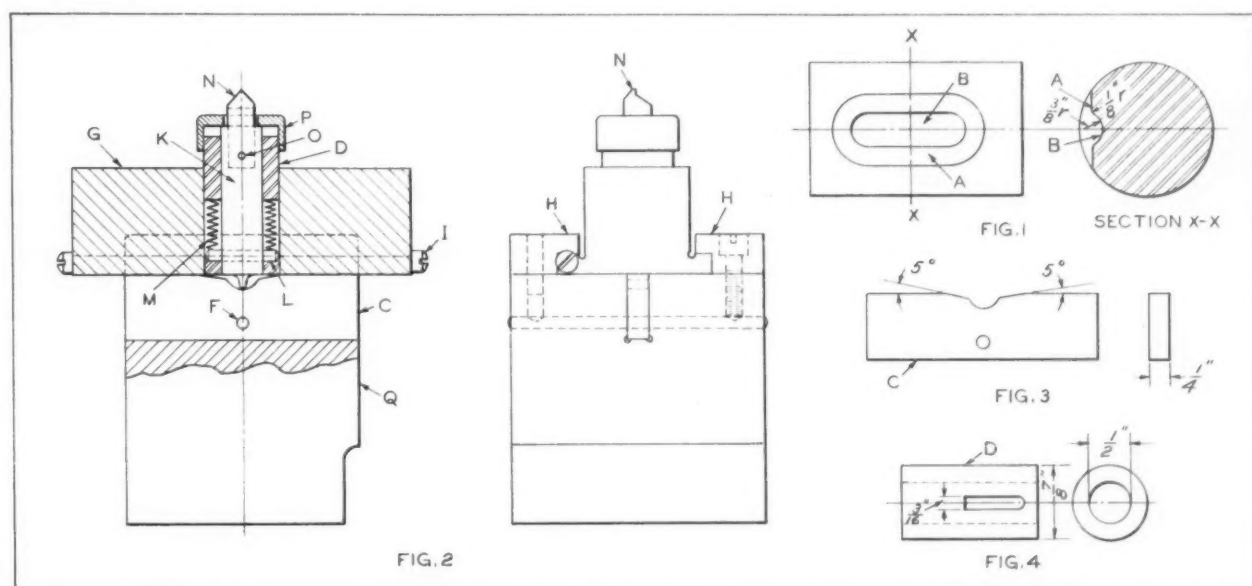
Steel Pin with Flat Spot *A* and Groove *B* Ground after Hardening. Fig. 2. Fixture Used in Truing Wheel for Grinding Groove *B*, Fig. 1. Fig. 3. Cam *C*, Fig. 2, for Guiding Path of Truing Diamond. Fig. 4. Sleeve *D*, Fig. 2
